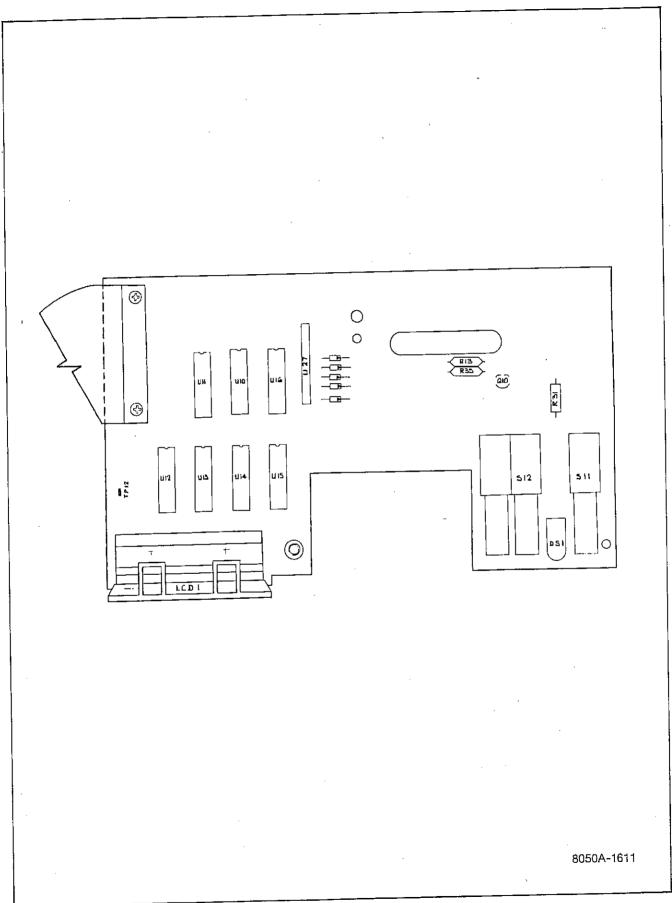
A1 Main PCB Assembly, 8050A-01 (cont)
